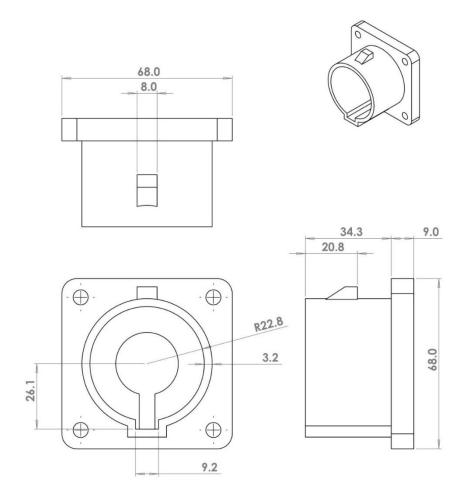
3D Printed Charge Port (dimensions in mm, subject to 3D printing tolerances)
